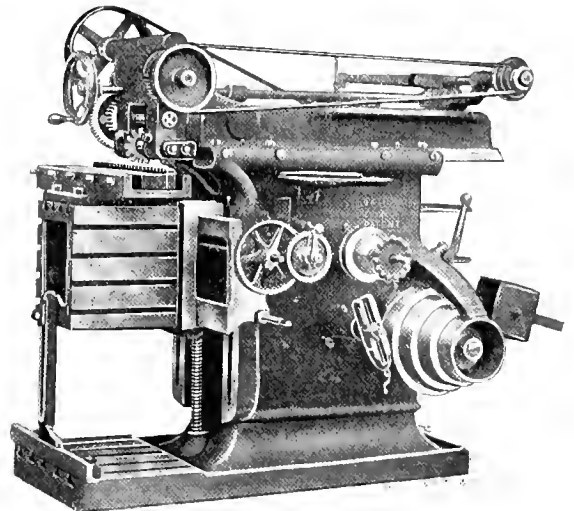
The Gould & Eberhardt Shaper with Attachment for Cutting Racks.
